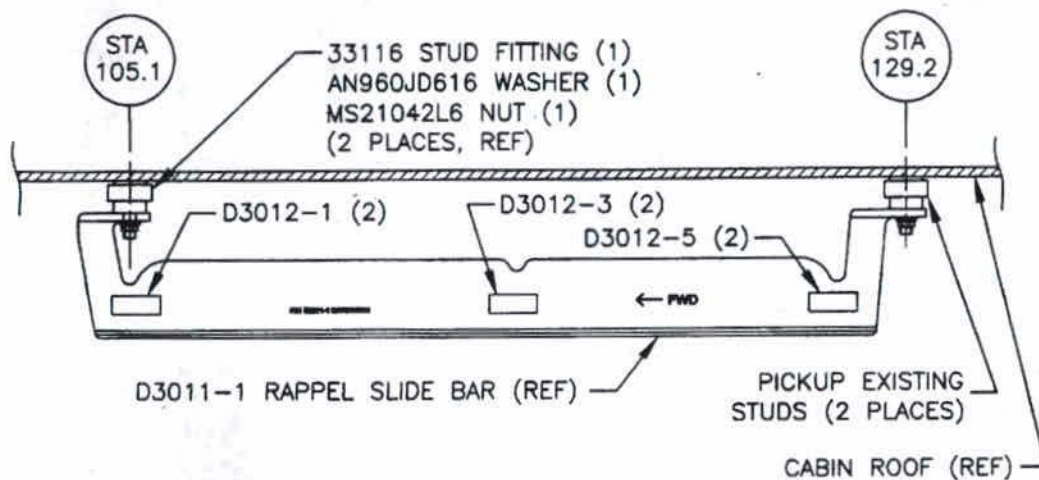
Installation of D205-523-043 Slide Bar Assembly
